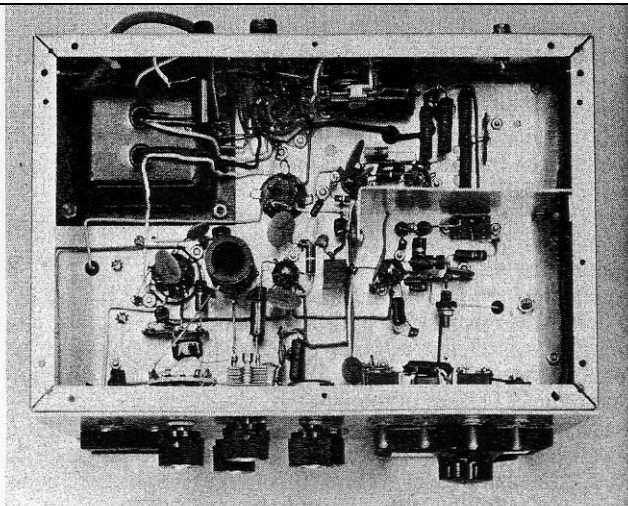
The underside of the transmitter. Layout is not especially critical. However, a clean layout will make trouble shooting much simpler, should that be necessary.
